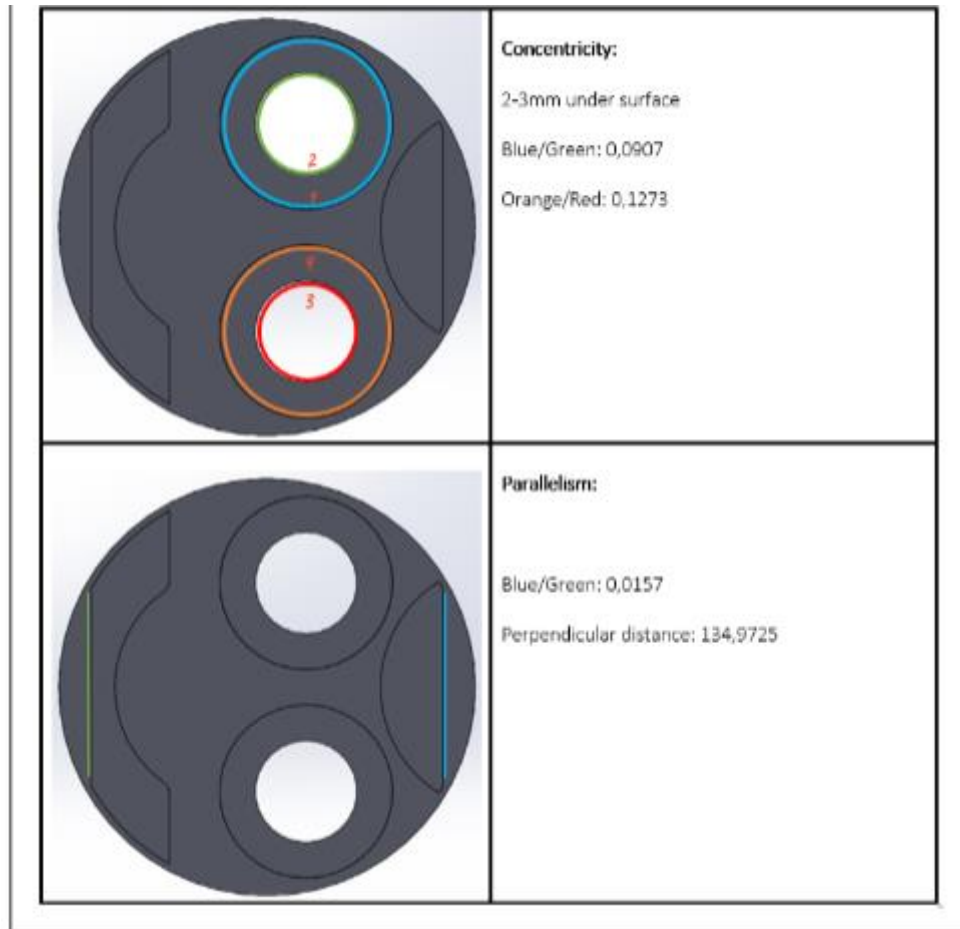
Geometrical and Dimensional Tolerance measurement – Data sheet Cast Iron-B-O/W.
